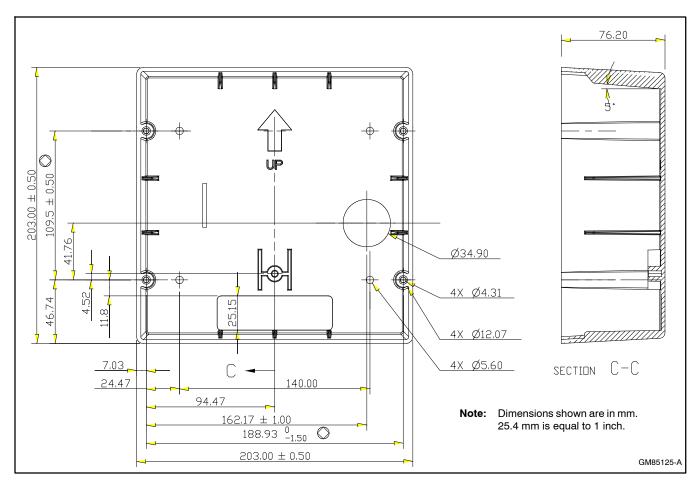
RSA III Mounting Hole Dimensions in Supplied Box GM85123
